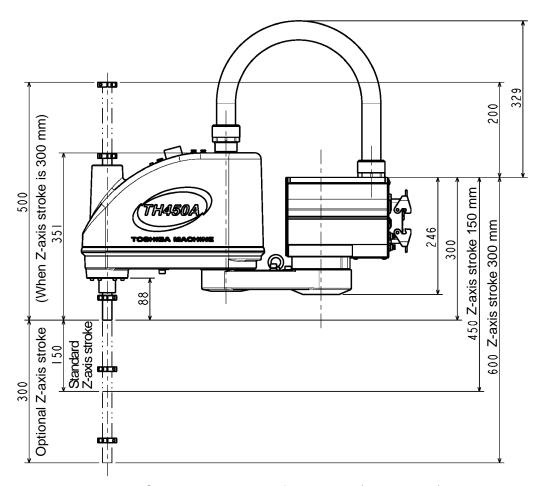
Outer dimensions of the robot (TH450A-T)
